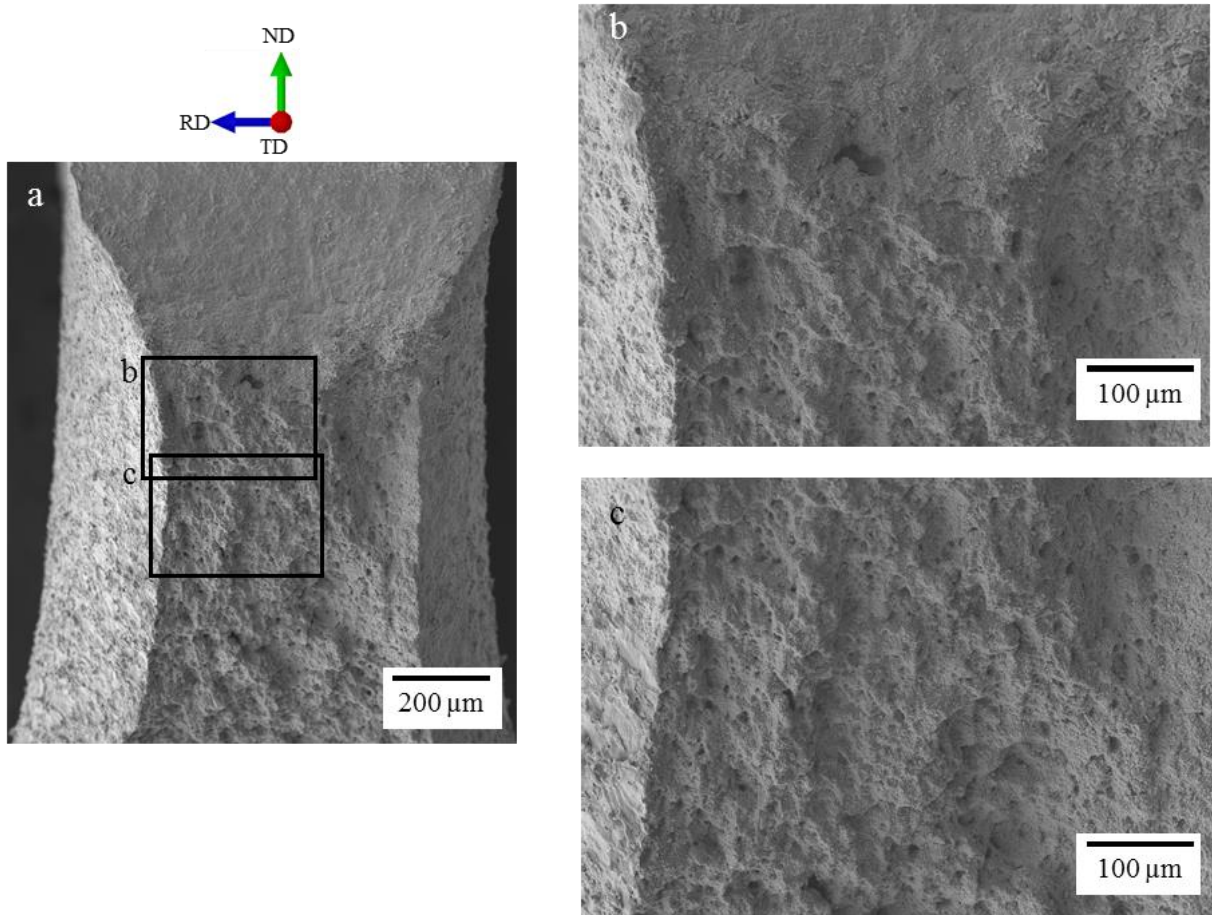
Fractographies of a Cu-15%Zn sample tested using the 3-point bending test at a displacement rate of 0.005 mm/min in air.
